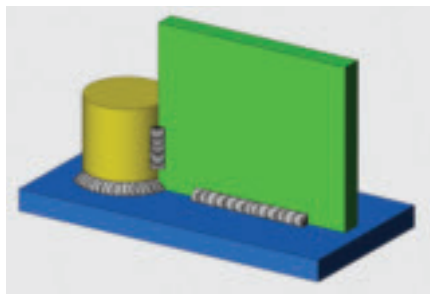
A welding coupon, similar to the artist rendering shown above, must be produced by the successful CRAW candidate as a part of the performance test. The coupon is composed of mild steel shapes that are pretacked and prepped for continuous welding by the CRAW robot.
